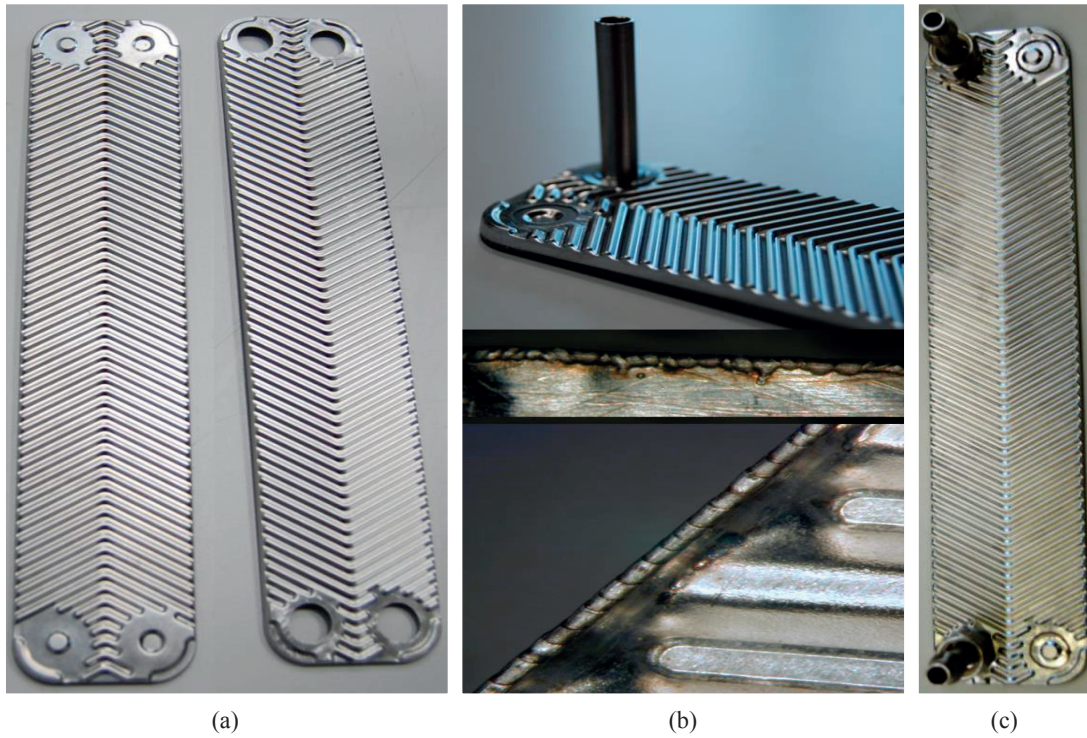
Plate heat exchanger prototype: (a) chevron test plate before assembling, (b) after applying laser welded technique, (c) test section with inlet and outlet pipes.
